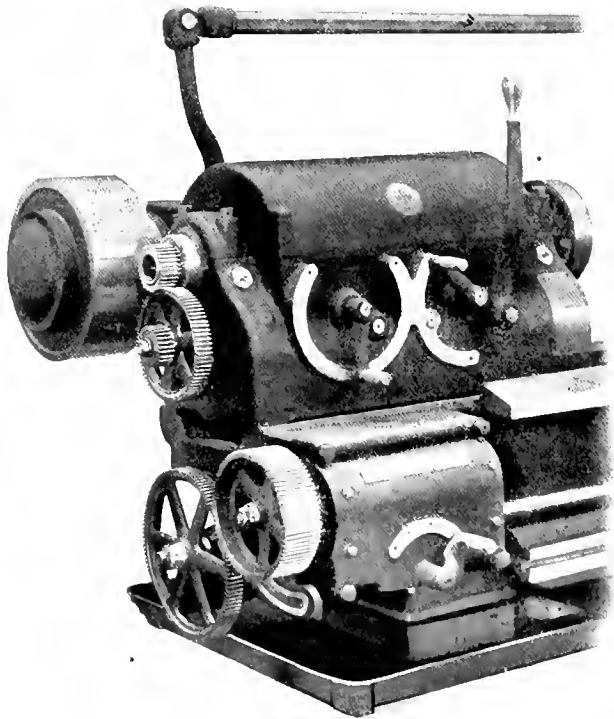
End View of Headstock, showing Simple Feed Change Mechanism
